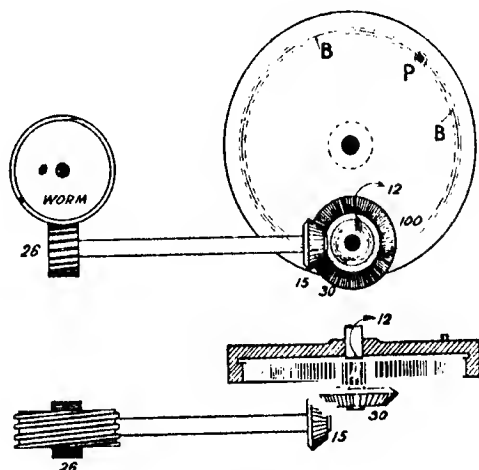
PLAN AND ELEVATION OF TWIST GEAR.
